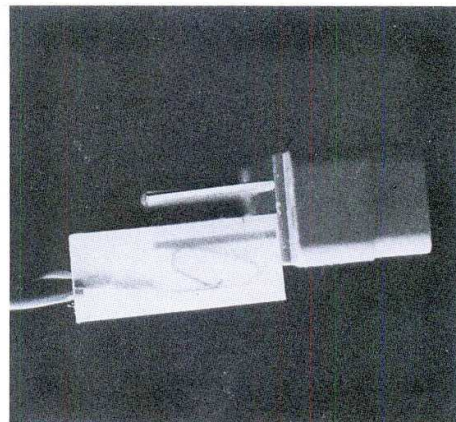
Special Molex Socket Shown Plugged On To Pins of a Wire Wrap P.C. Board Socket.
